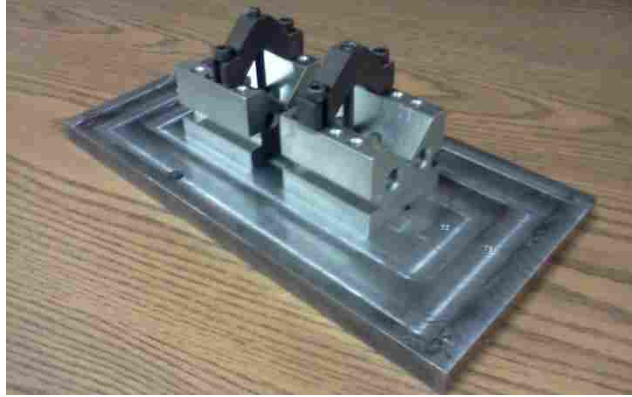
Clamp Used to Hold Specimens while Impacted
